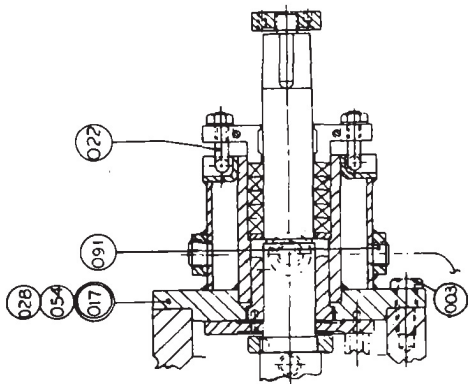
VIEW OF INBOARD END WITH WELDED PACKING BOX COVER
